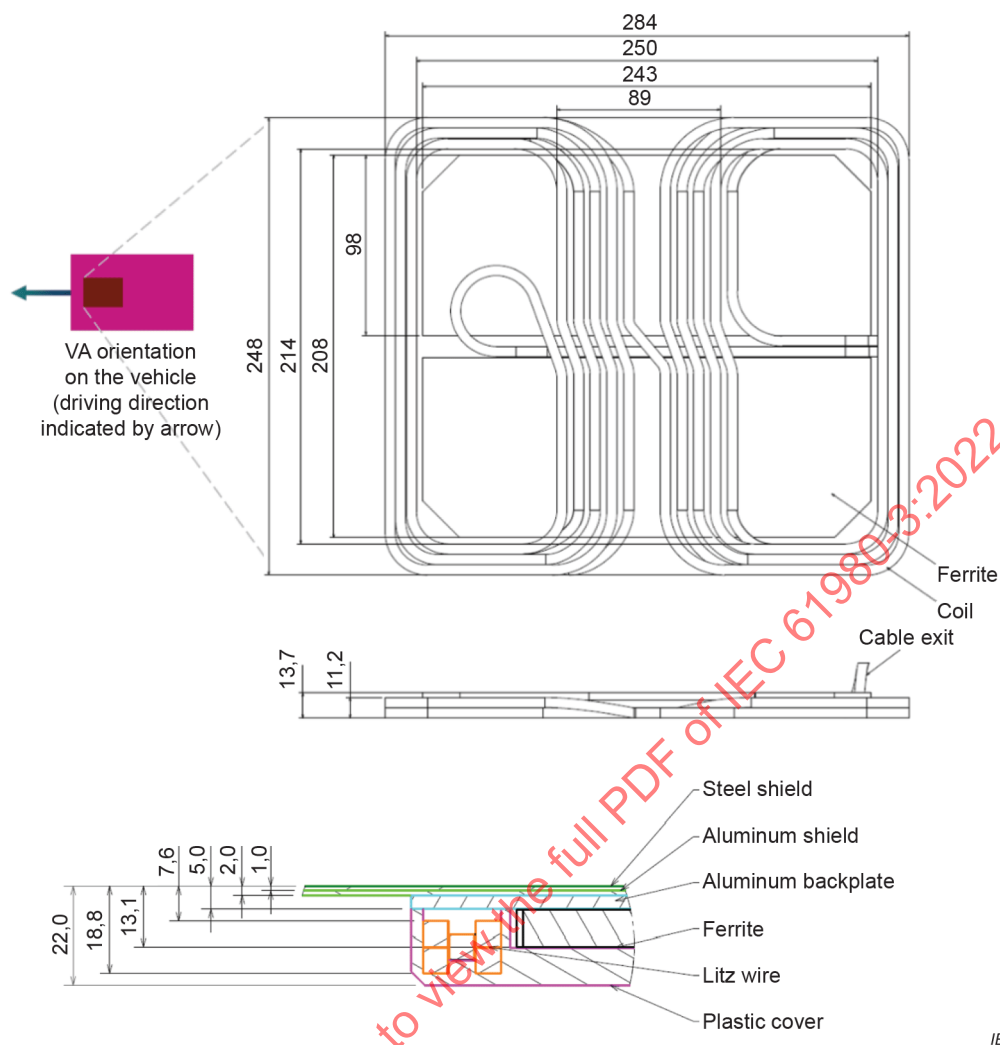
Mechanical dimensions of the MF-WPT3/Z1 DD secondary device
